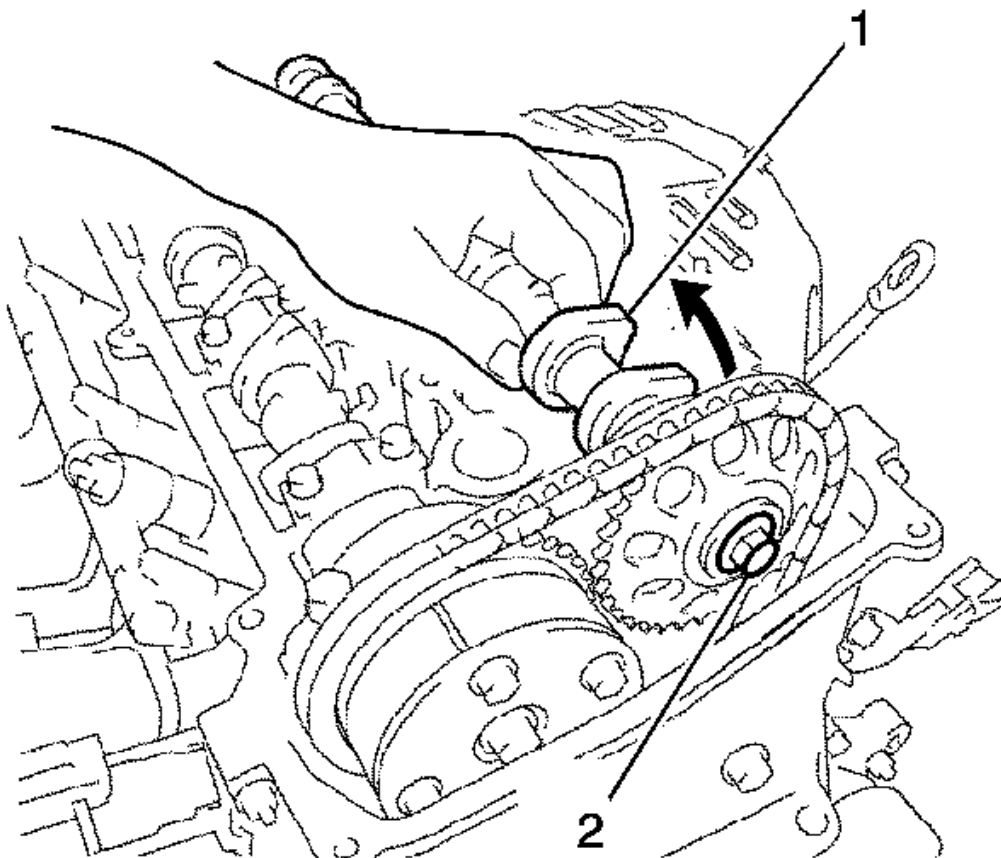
Tightening Camshaft Timing Sprocket Set Bolt
